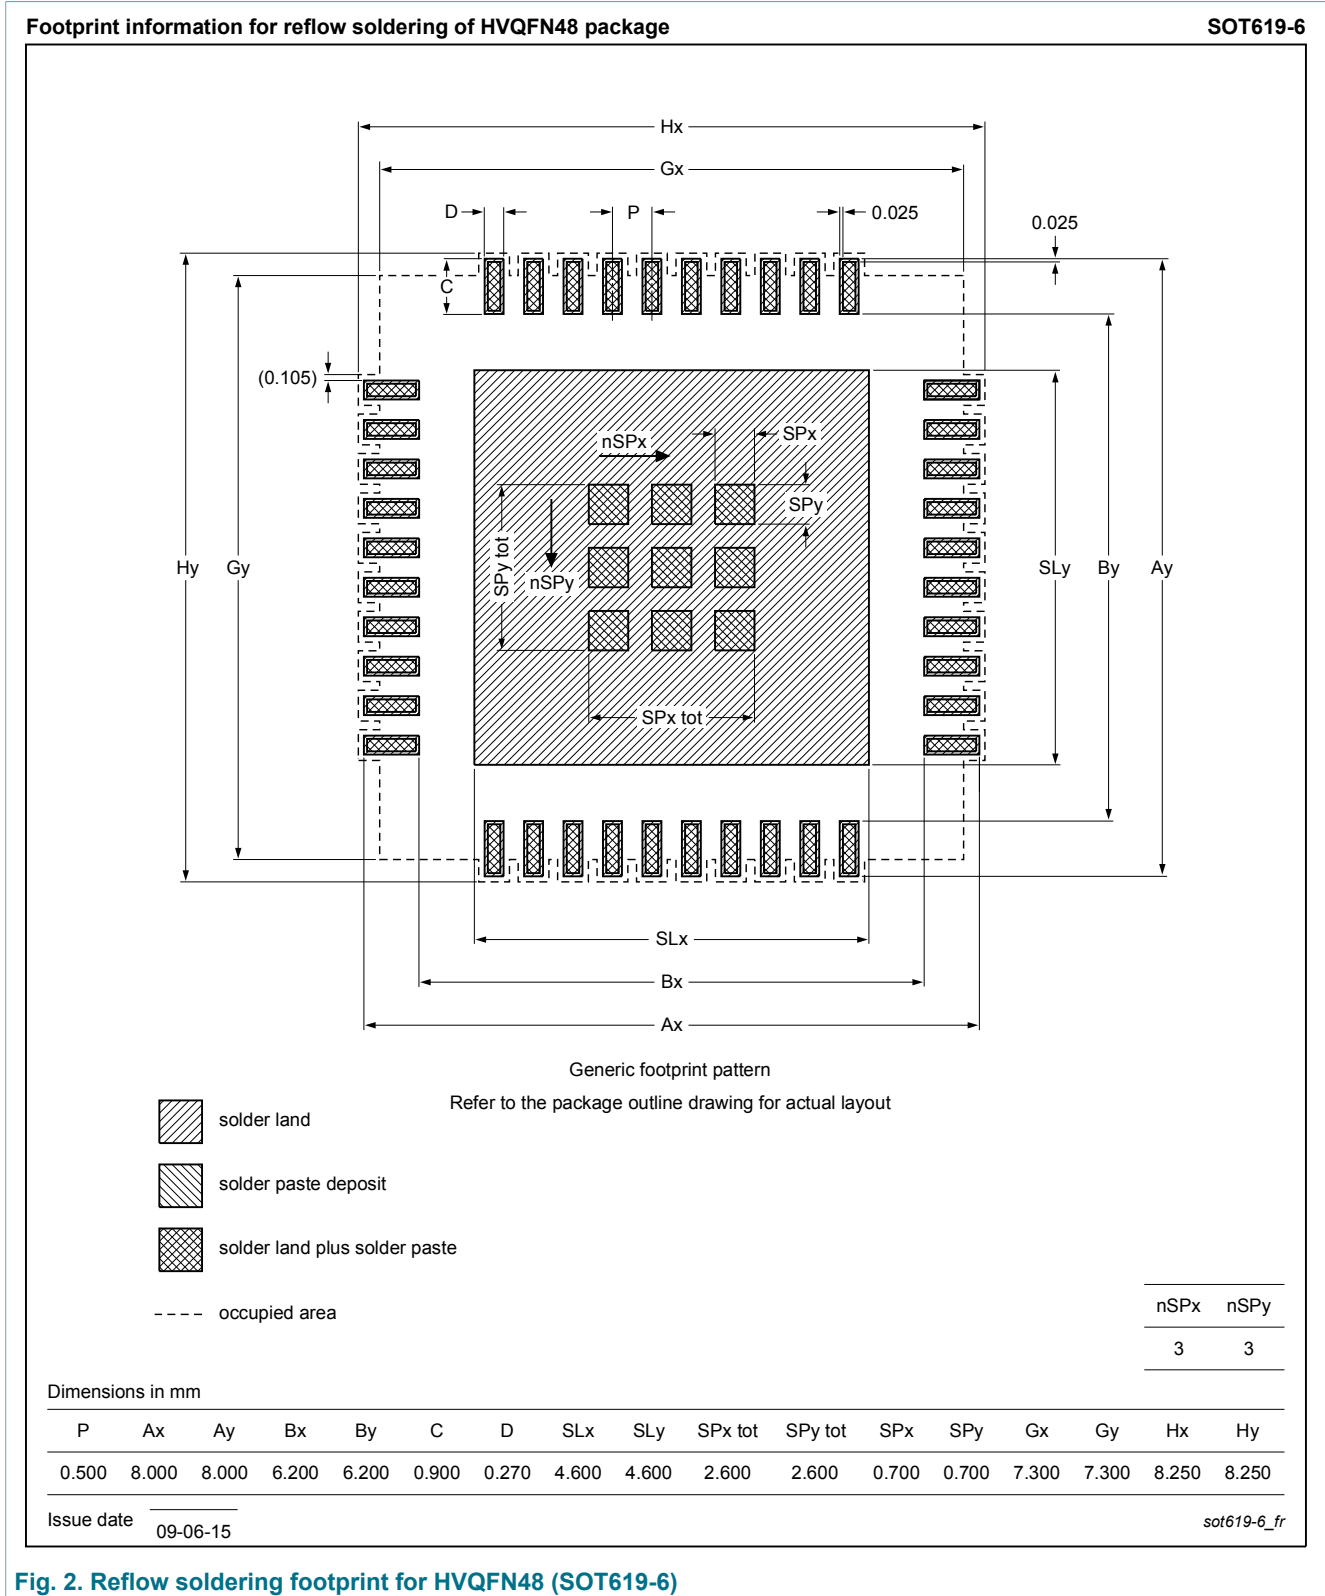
Reflow soldering footprint for HVQFN48 (SOT619-6)
